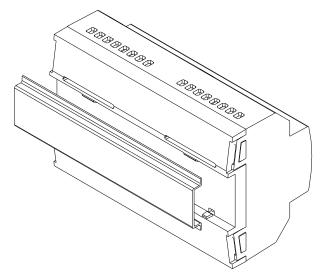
MAXinBOX Shutter 8CH DIN-rail assembly
